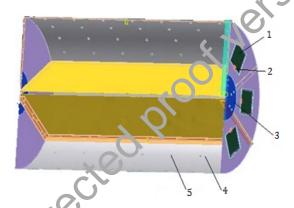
Half-section plan of three-dimensional model of robot drum. 1-Fill port, 2-Living hinge, 3-Welding plate, 4-Loading bin, 5-1 mm keyhole.
